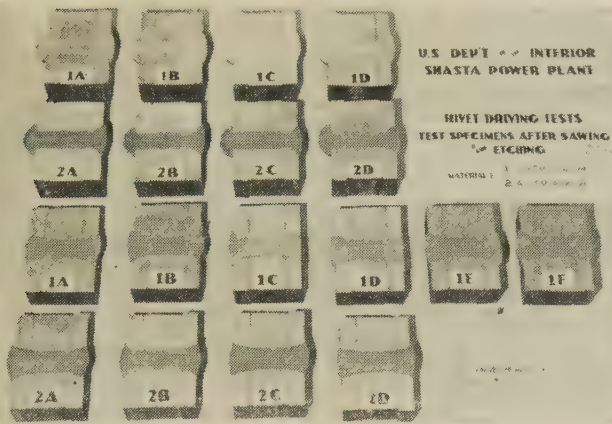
SAMPLE RIVETS $1\frac{5}{16}$ IN. DIAM OF DIFFERENT TYPES AND GRADES CUT THROUGH CENTER, SHOWING 1-IN. BUTT STRAPS AND $2\frac{5}{16}$ -IN. PLATE
